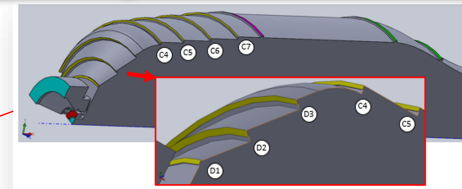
Details of the Fluid Inlets, Purposed Indicated by Face Color: CO₂+O₂ Inlet (Teal), Fuel Inlet (Red), Wall Cooling (Yellow), Recirculation Control (Magenta), and Dilution (Bright Green)
